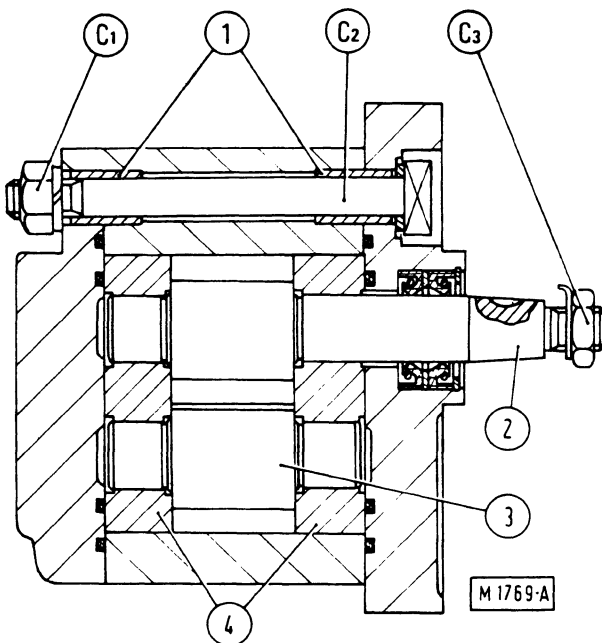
Longitudinal section of hydraulic pump for steering clutches and brakes (model FL 14-C and 14-C clutch).
